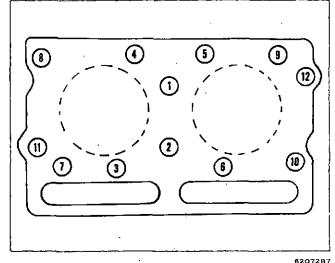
Cylinder head tightening sequence – NH-5-1/2" bore
